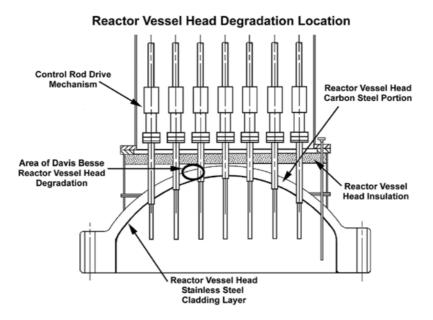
PWR vessel head penetration cracking of alloy 600 allowed leakage of borated coolant to occur. This corroded the C&LAS RPV head externally down to the internal surface stainless steel cladding.
